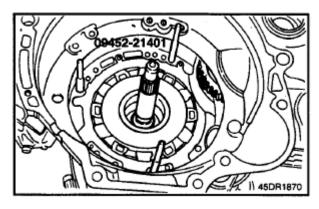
Identifying Reverse And Overdrive Clutch Components
